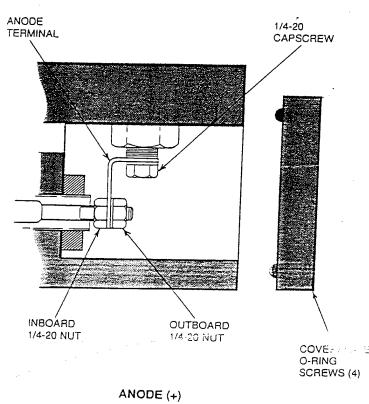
6-Inch PRAM Prototype Flashlamp Removal and Installation
